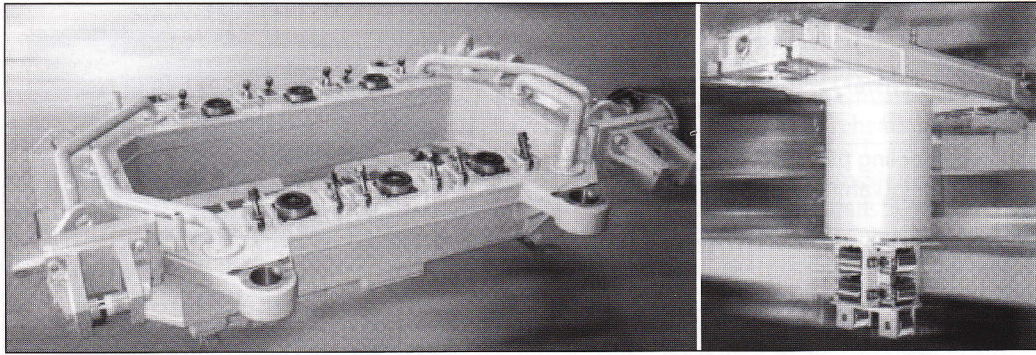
Stainless Steel Triple Casting Mold with Mold Adapter Frame.
